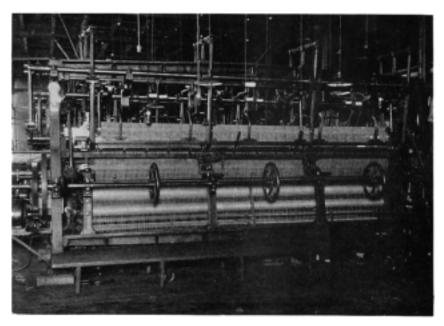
(b) BOBBINET-JACQUARD MACHINES.
